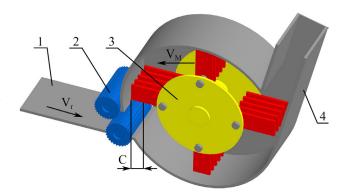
Design and technological scheme (3D) of a feed grinder from by-product stem raw materials: 1 — belt feed conveyor; 2 — pre-pressing drum; 3 — hammer rotor; 4 — deflector
